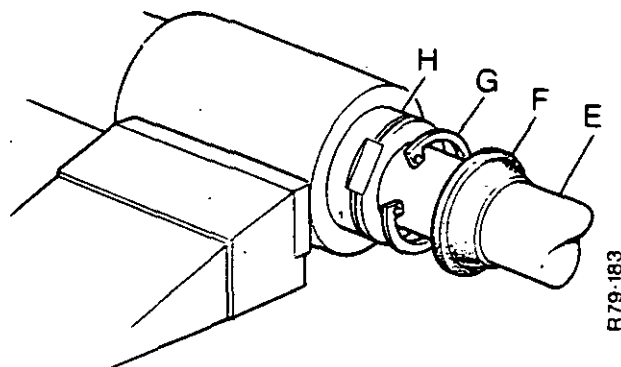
DISASSEMBLY OF THE SUPPORT RAM
